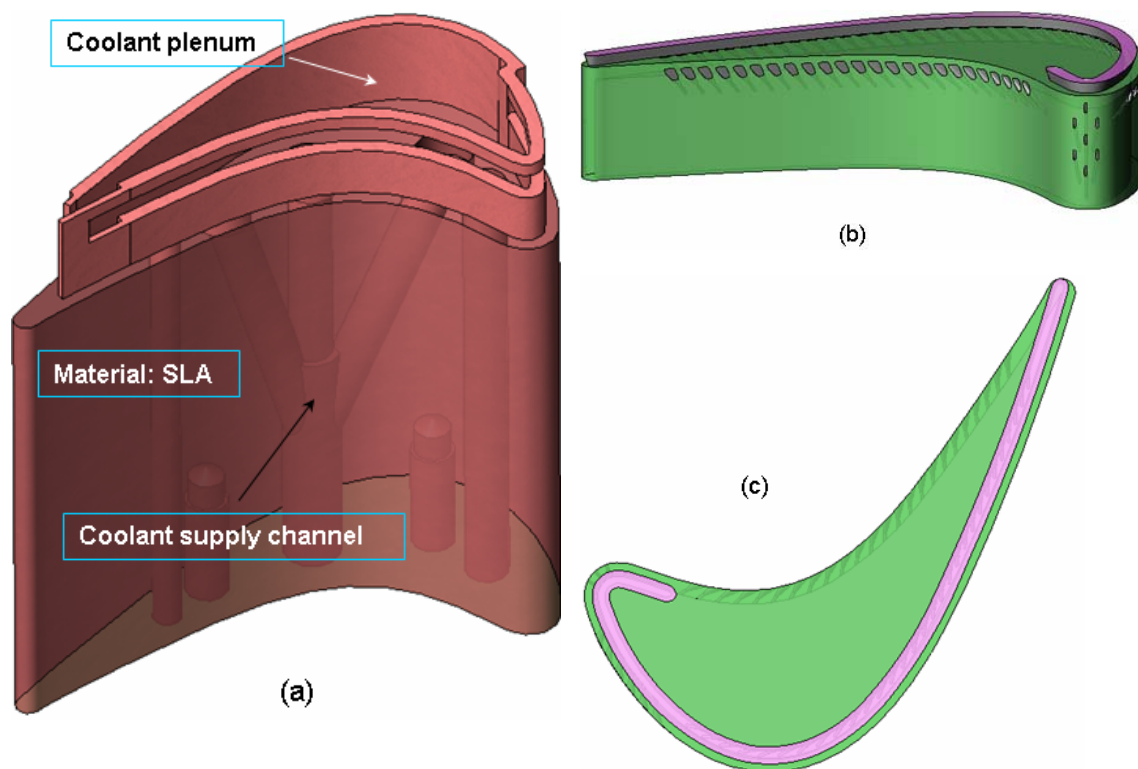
(a) Test blade with surface pressure taps (b,c) Squealer rim blade tip shell
